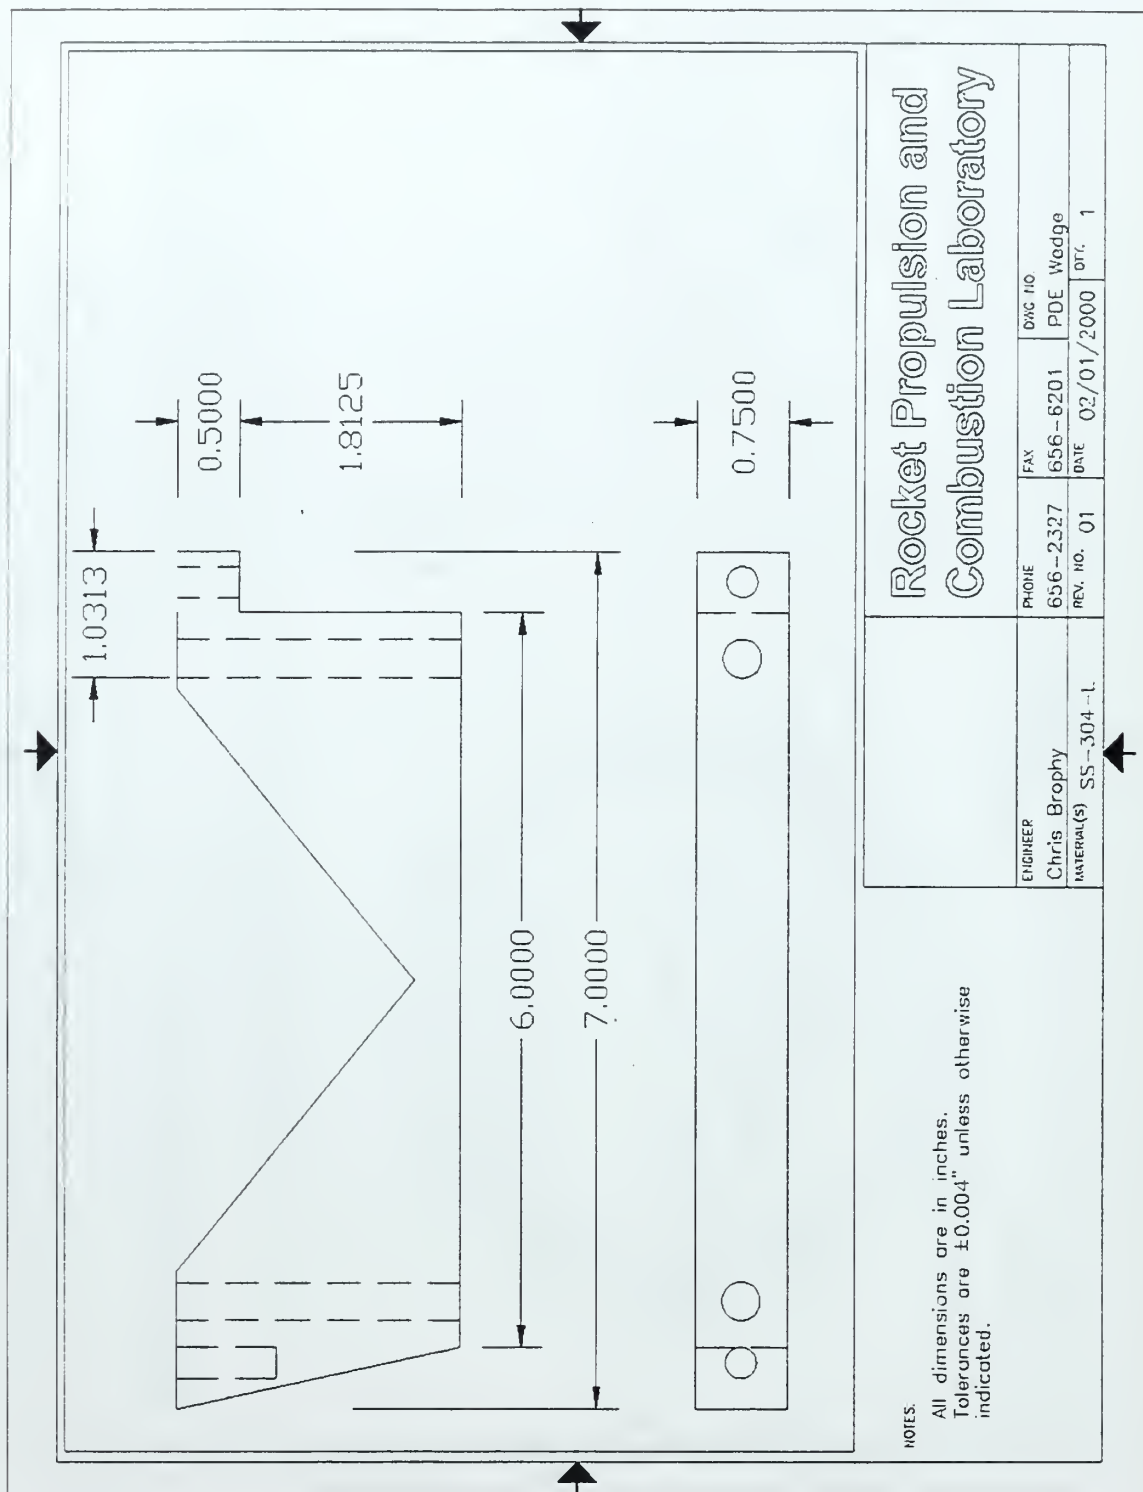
This wedge was used to support the main combustion tube and fuel injection manifold on top of slide rails, allowing an accurate measurement of thrust.
